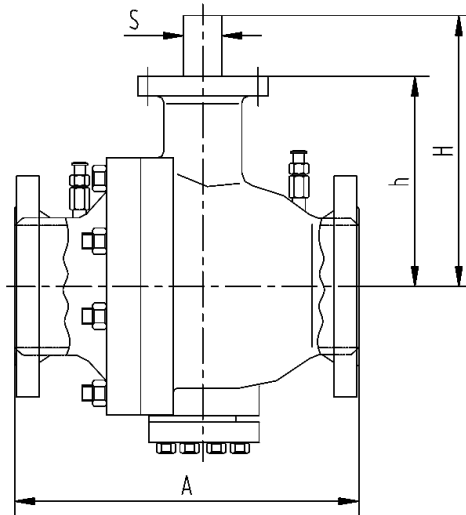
Overall Drawing Without Actuator, 18" DN450 ~ 24" DN600
